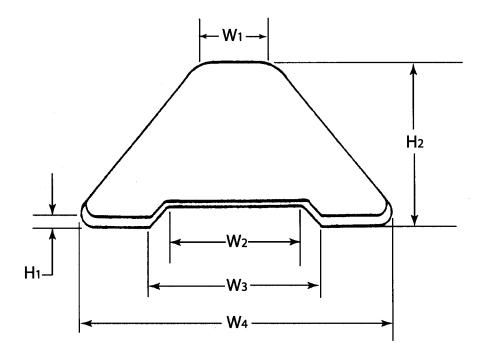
Track Shoe Pad Dimensions (footprint data)
